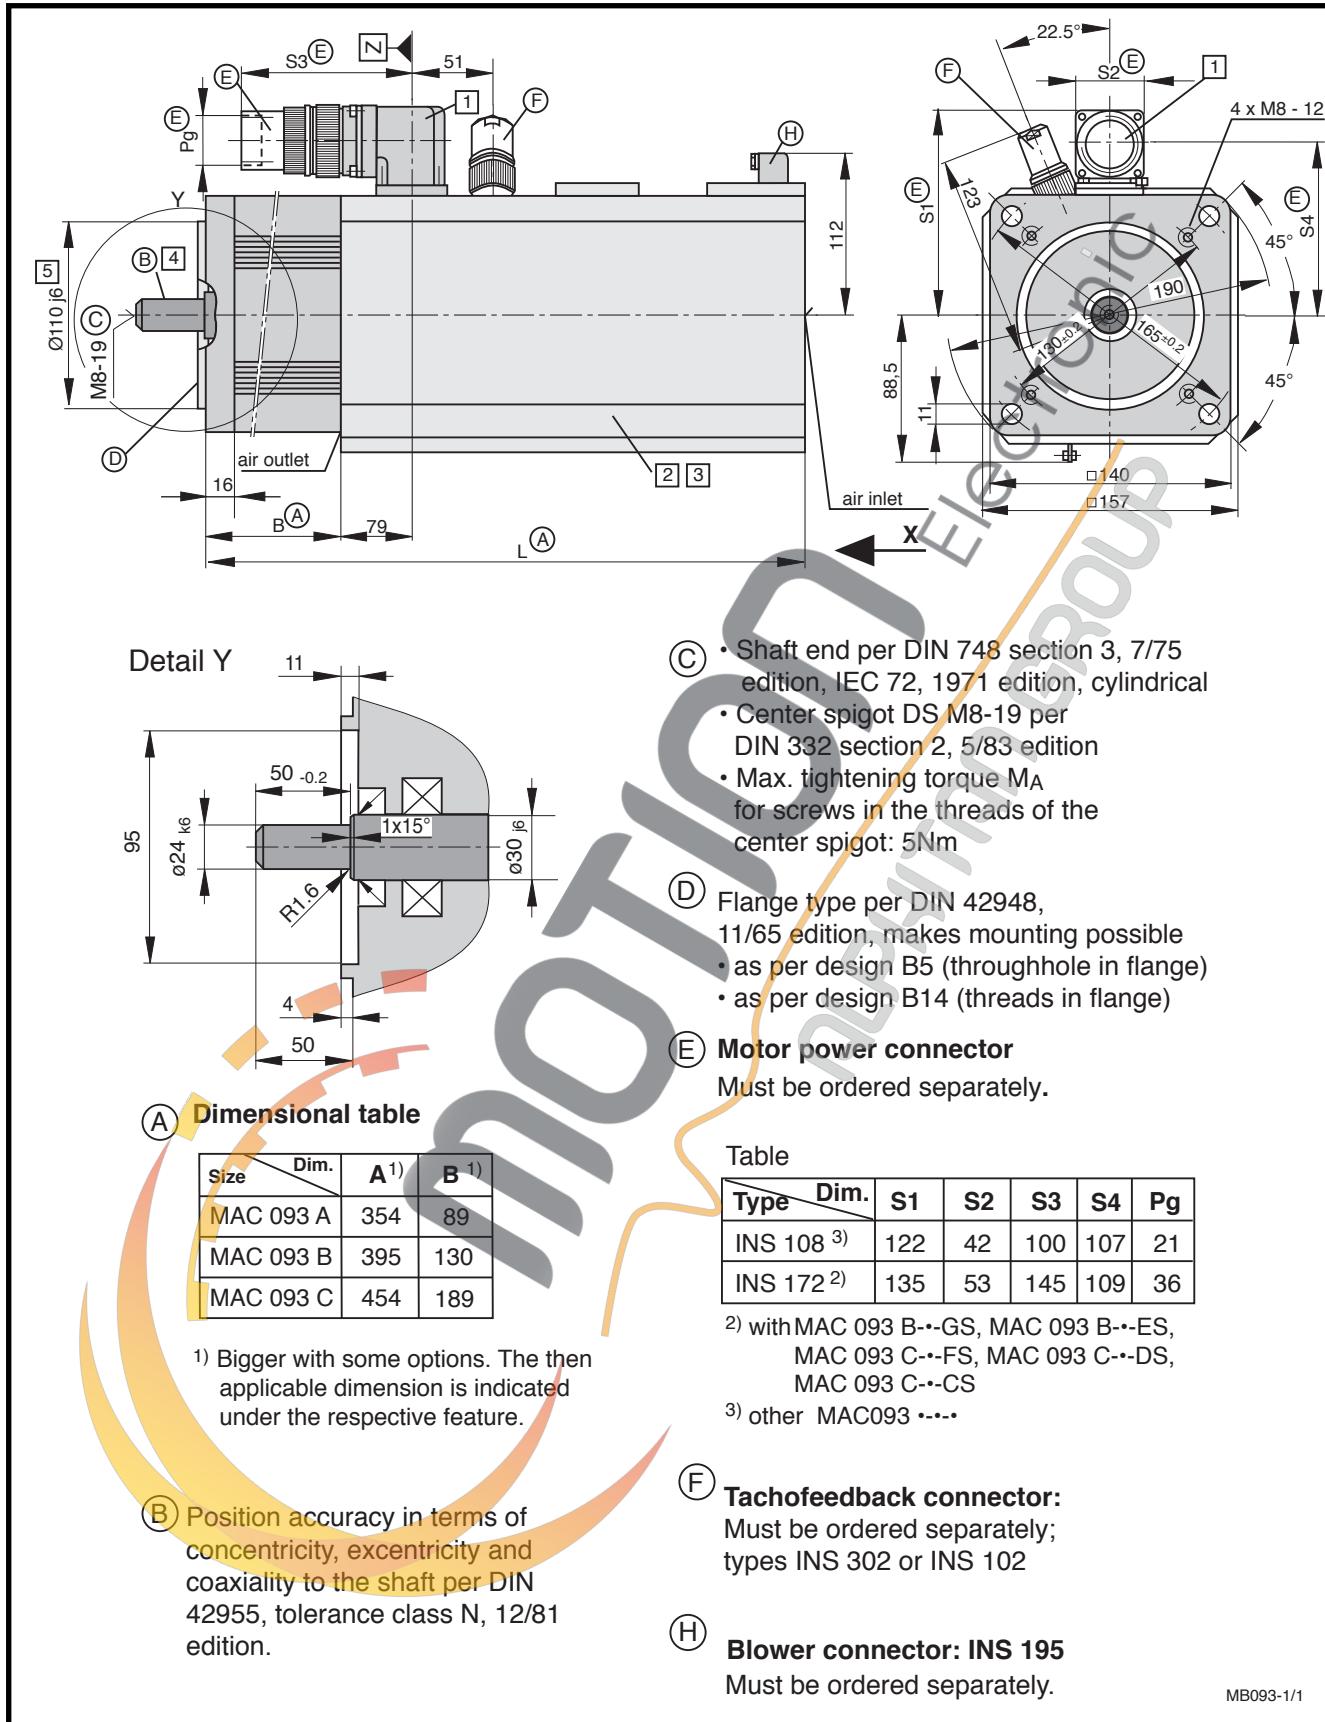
Dimensional data - MAC 093 (axial cooling)
